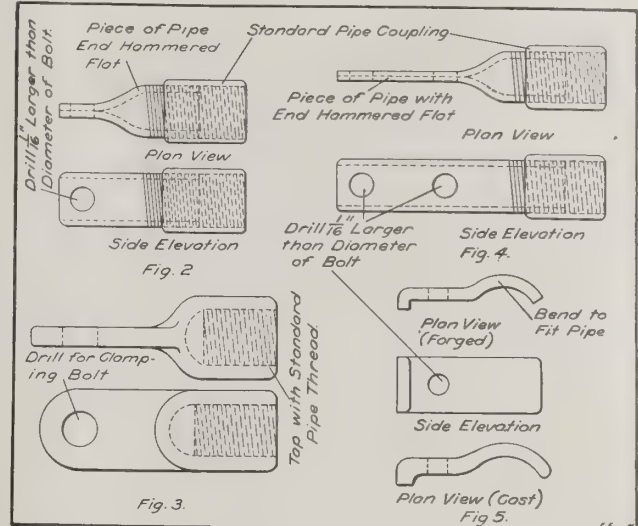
SOCKET FITTING OF PIPE. FIG. 3. CAST SOCKET FITTING. FIG. 4. U-BOLT STUD OF PIPE. FIG. 5. WROUGHT IRON CLAMPING FINGER.
